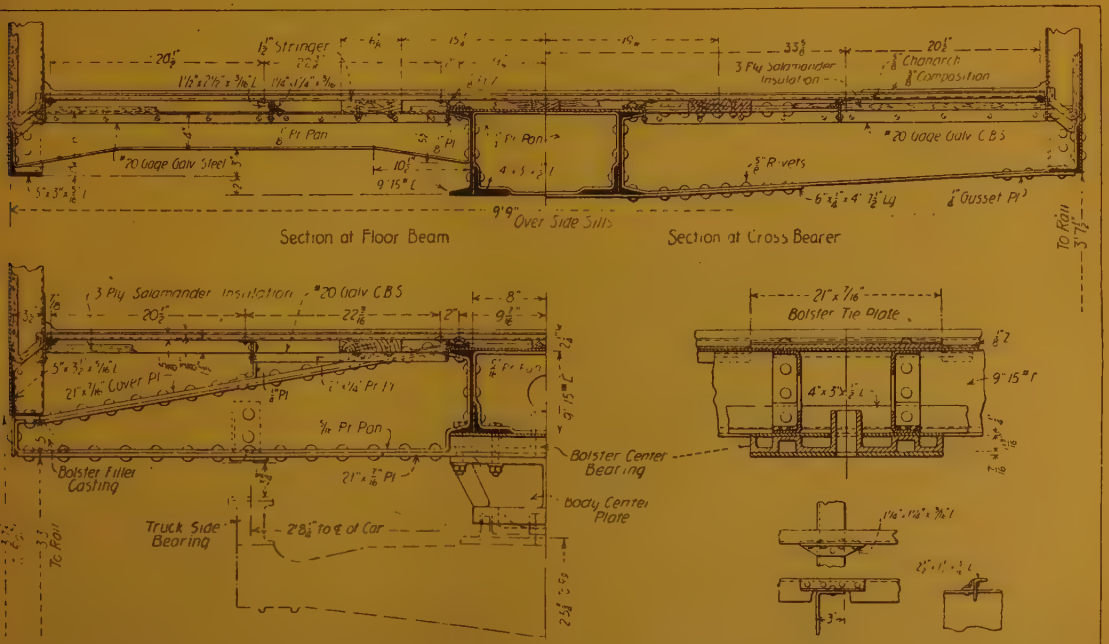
Structural details of underframe and body bolster for new Illinois Central Railroad all steel suburban cars.
